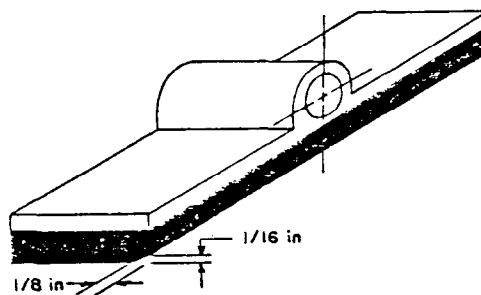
Slider Assembly Illustrating the Maximum Wear on Striking Edge.
